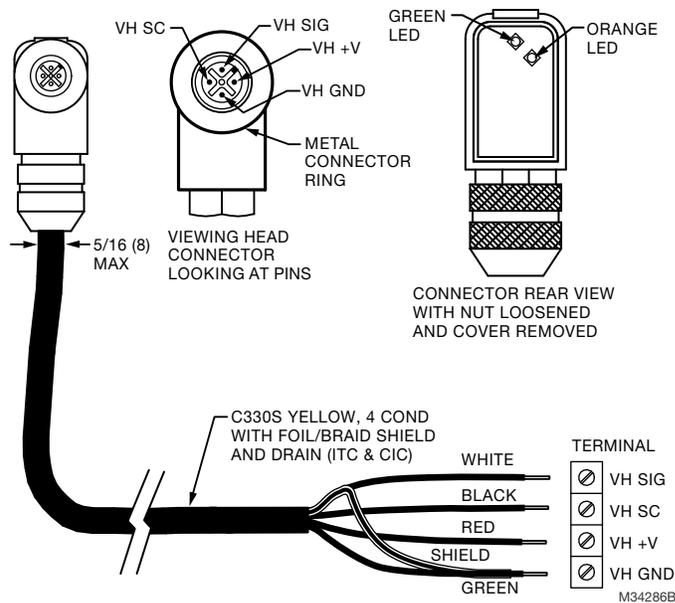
Model 700/800 Viewing Head Cable Connections.
